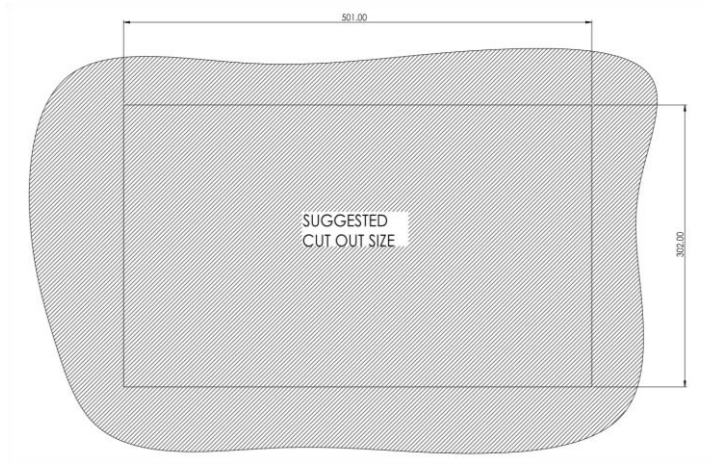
AURA-W215-RK3576 Panel Cutout Dimensions
